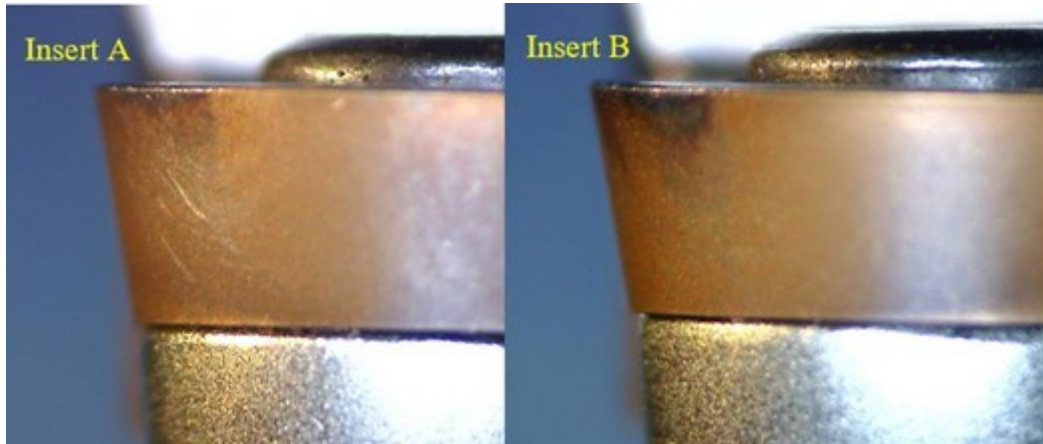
The wear images of insert A and B after milling one layer of the workpiece.
